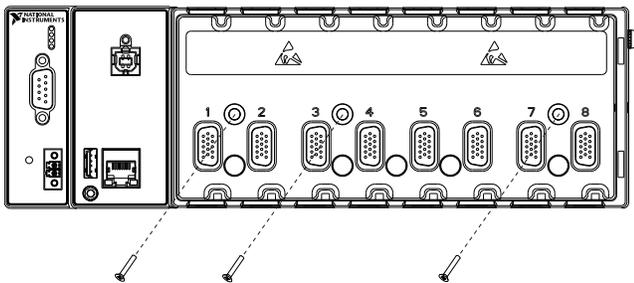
cRIO-9066/9067/9068 Mounting Hole Locations, Typical
